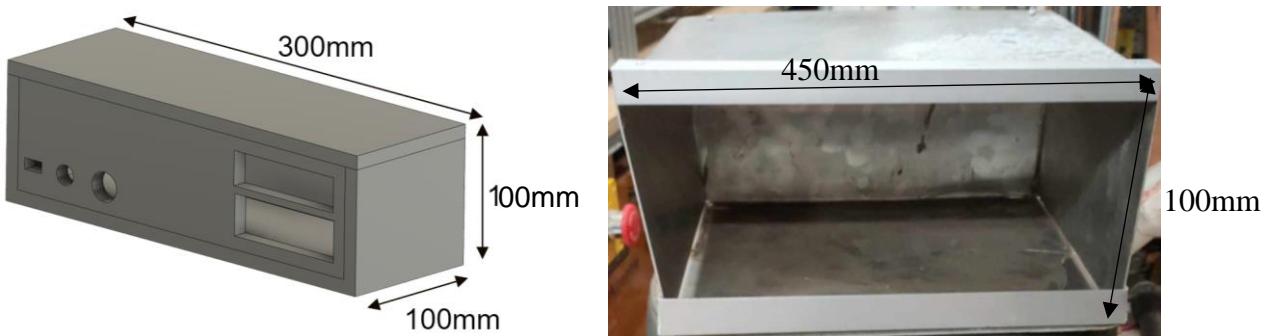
Left: CAD model of initial case design. Right: Prototype metal case prior to final assembly.
